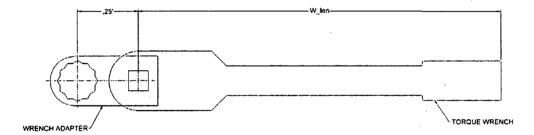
Wrench Adapter and Wrench Torque Arm Dimensions
